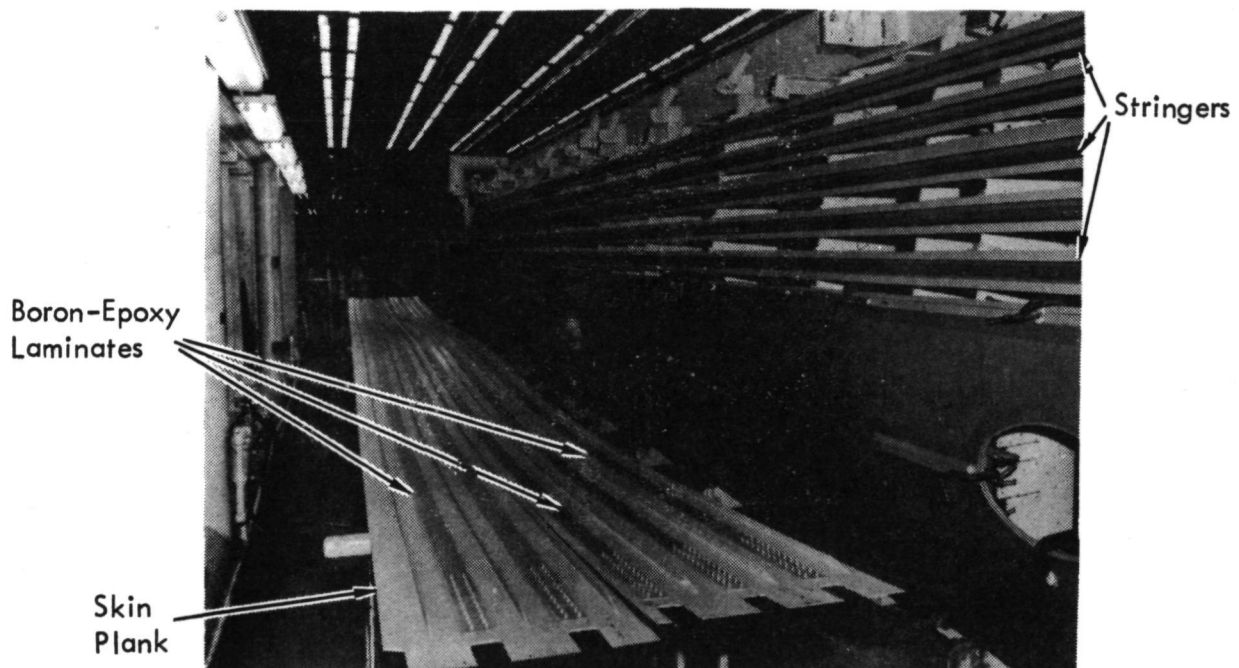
C-130 CWB UPPER SURFACE ASSEMBLY
